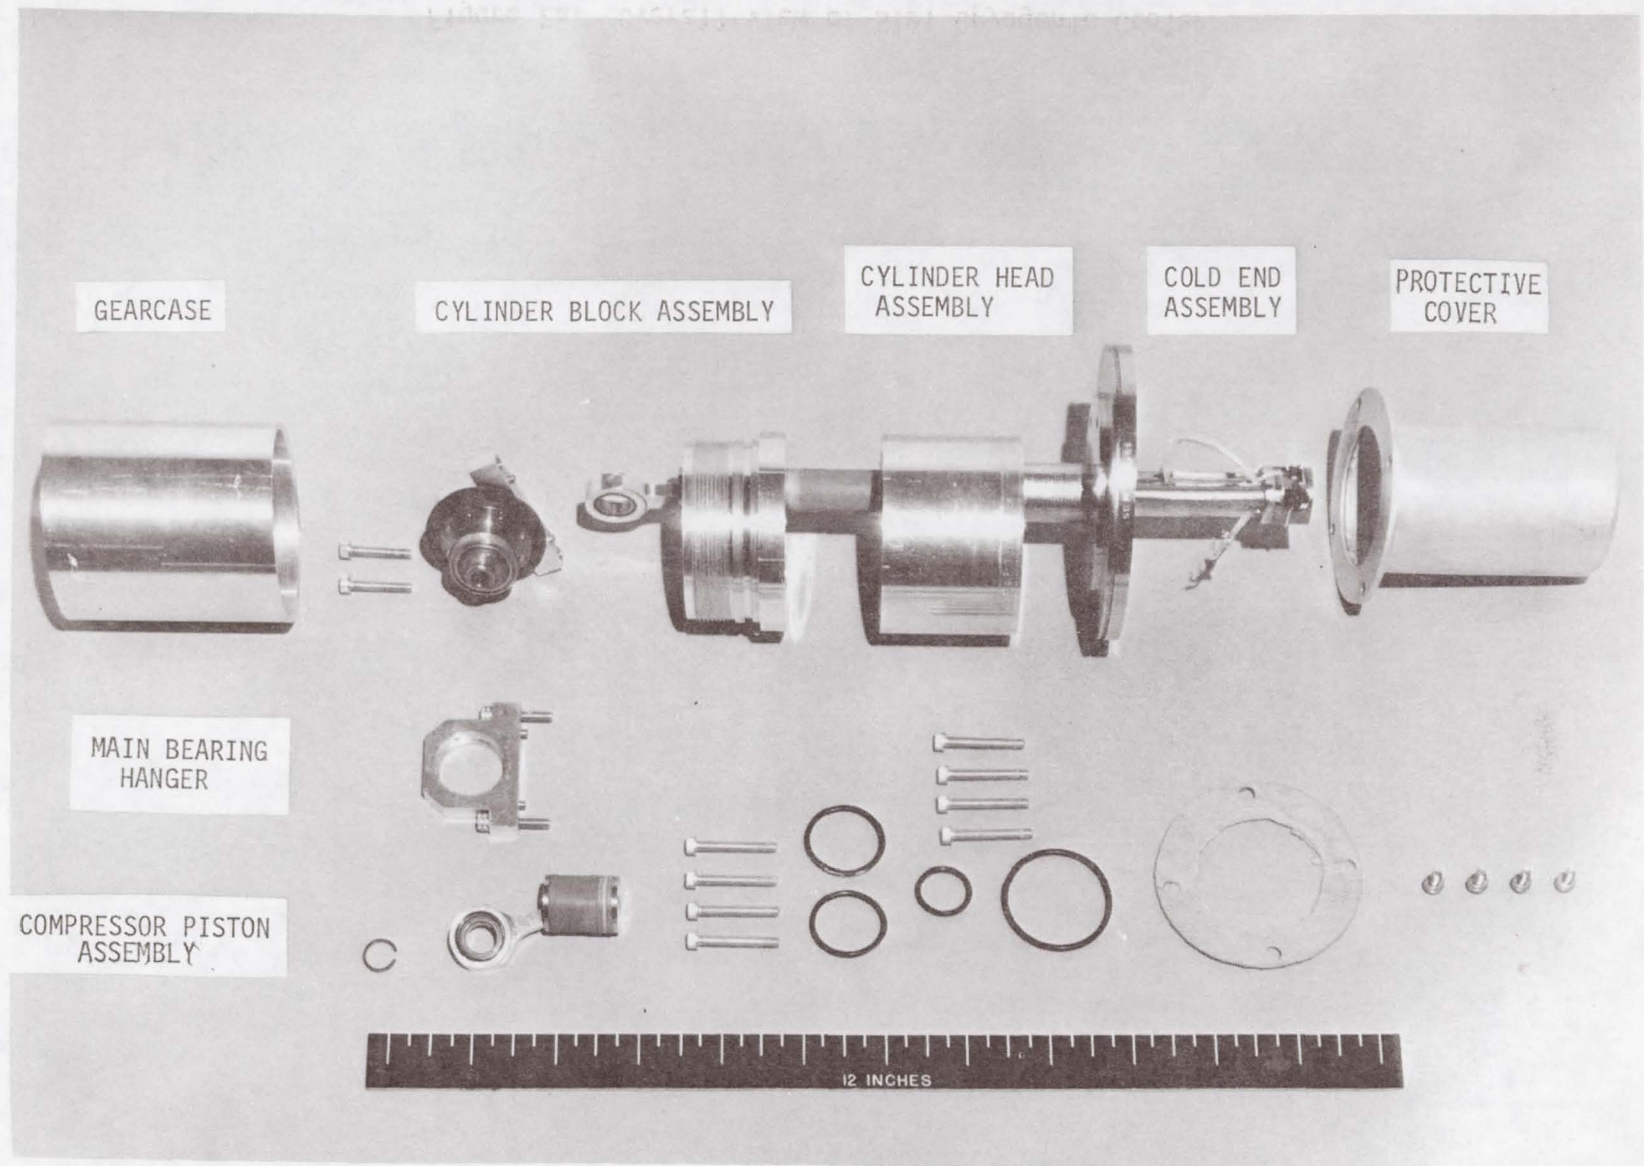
Exploded View of S191 Cryogenic Cooler (Less Drive Motor and Outer Case)
